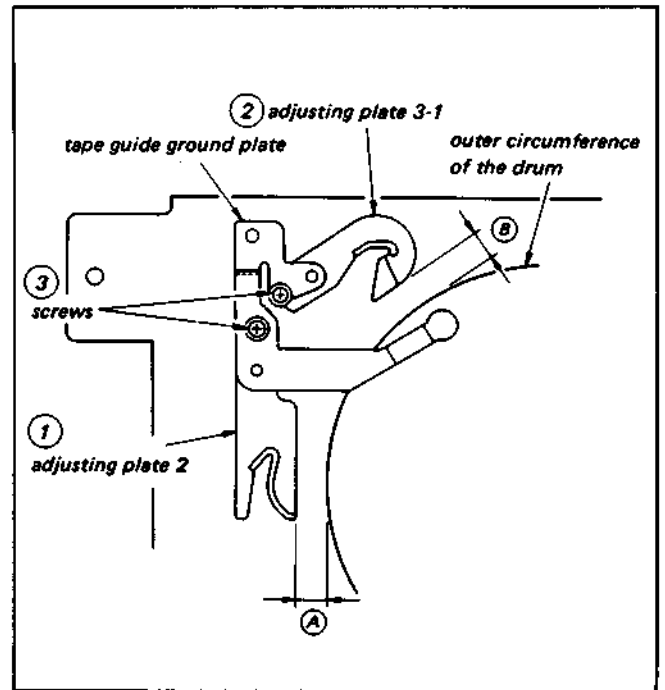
Measurement of the position of adjusting plates 2 and 3-1
